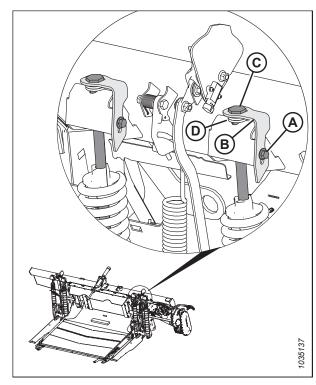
Float Adjustment Bolts – Left Shown, Right is Similar
